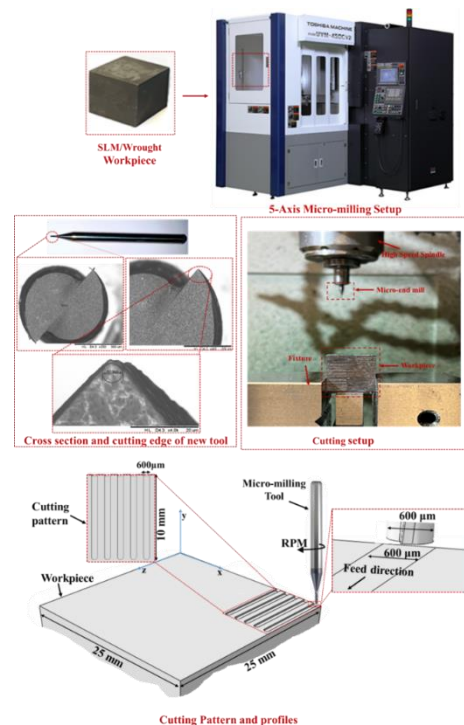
1 Experimental setup showing micro milling setup, geometry of tool and cutting profiles
